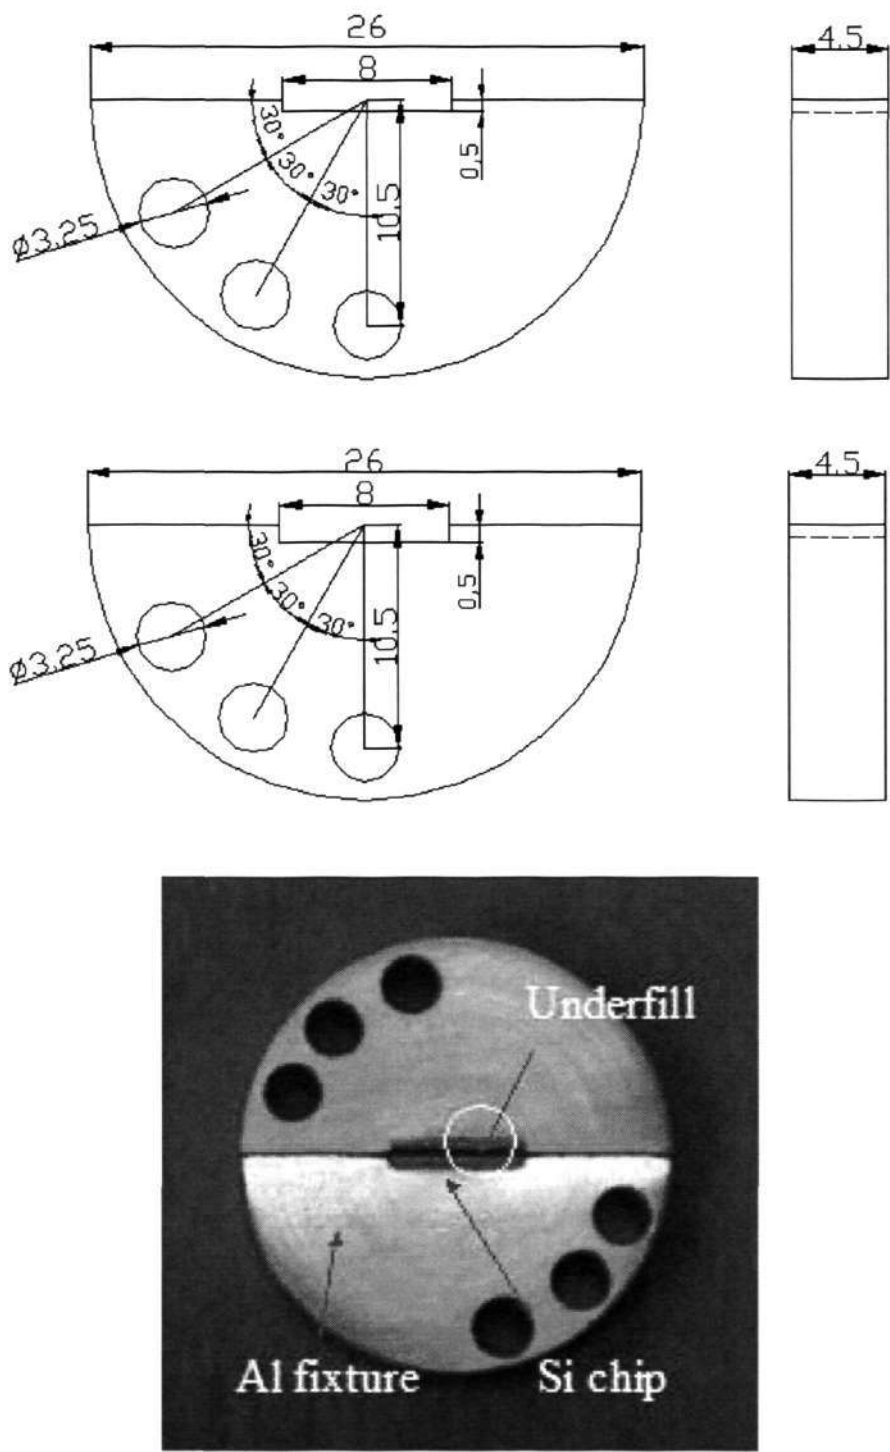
Specially designed SBN fixture (dimensions in mm)
